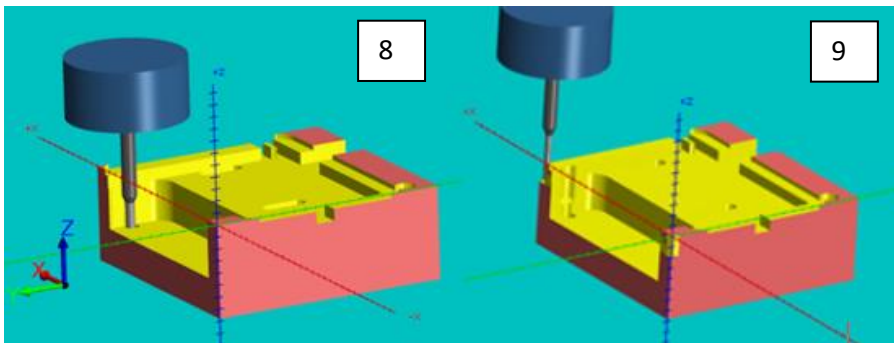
Snipping Tool Image of Steps 8,9 Mastercam Tool Paths
